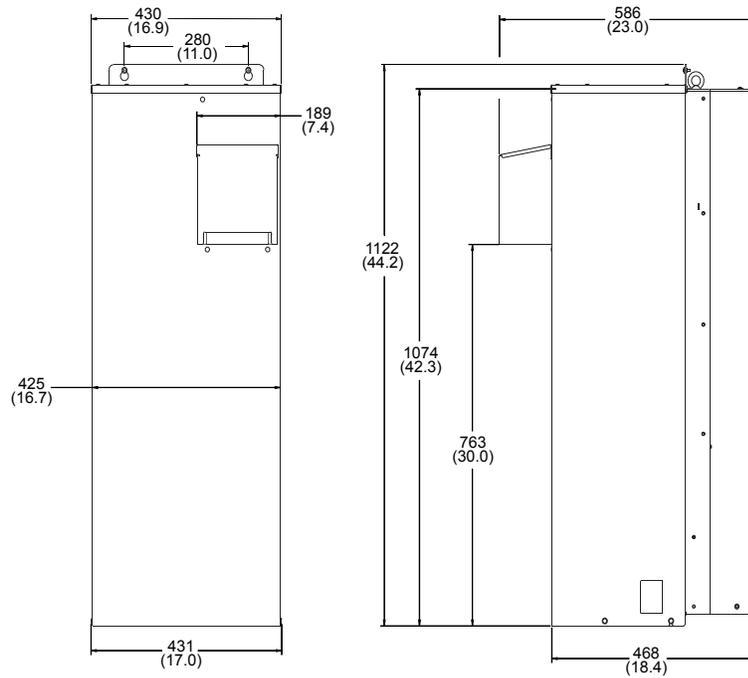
Exterior dimensions for D2h with NEMA 3R Kit (9K716)
